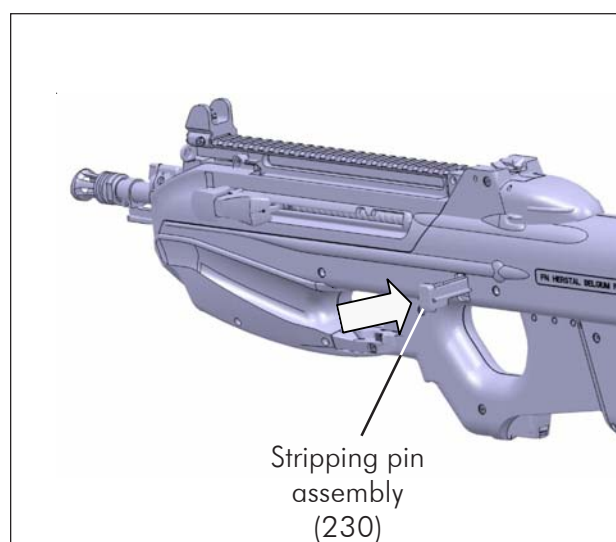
r - Pushing on the stripping pin assembly (230)
